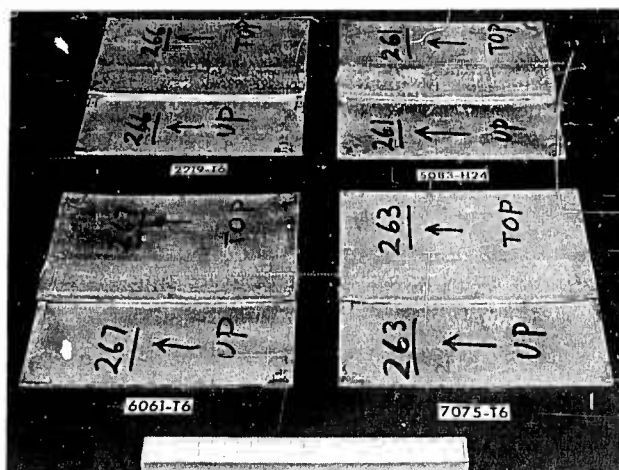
Explosively seam welded, lap joints in aluminum alloys
